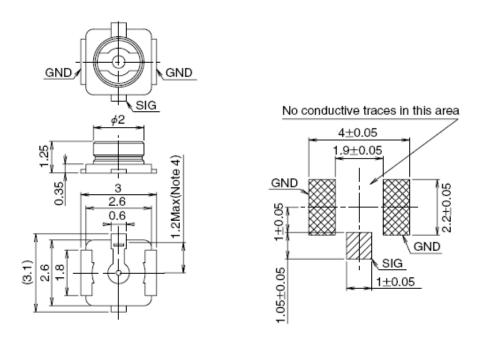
Dimensions of the U.FL-R-SMT Connector (Unit: mm)
